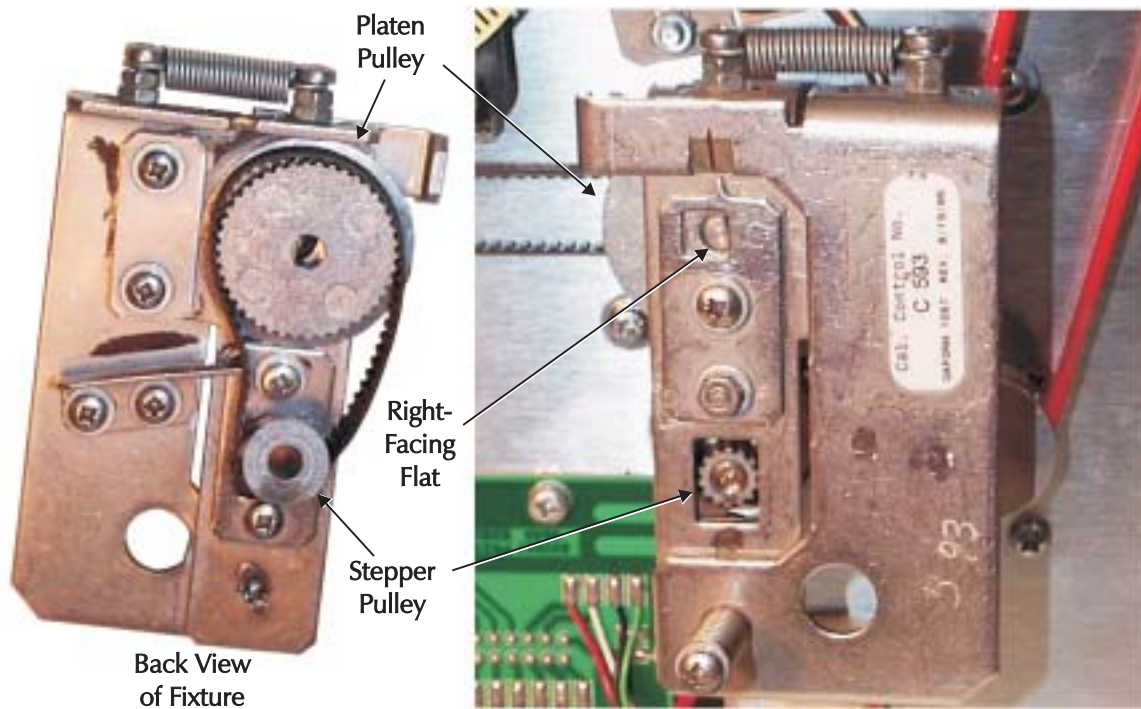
Stepper Motor Belt Tensioning Fixture.
